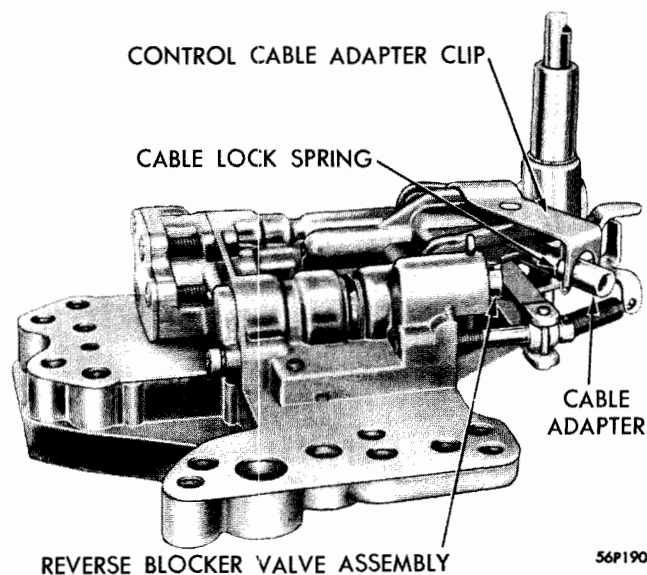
Control Cable Adaptor and Reverse Blocker Valve
